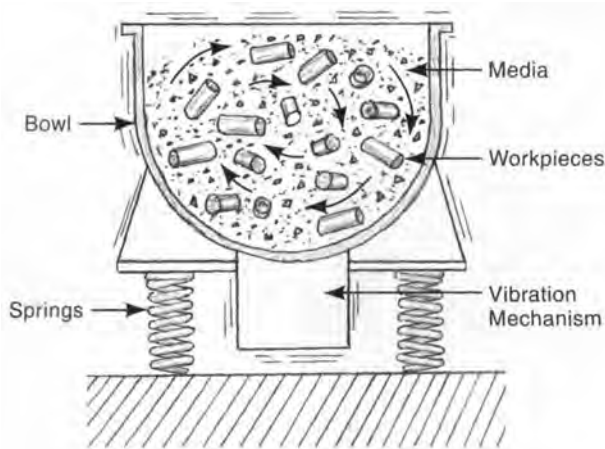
K11 Vibratory deburring. An eccentrically-mounted weight on a rotating shaft provides the vibration.
